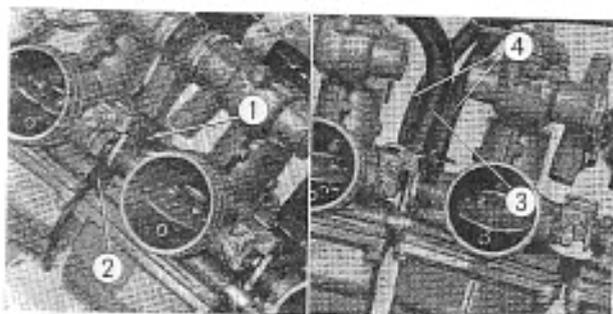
① Fuel tube (2.5×16) ③ Fuel tube
